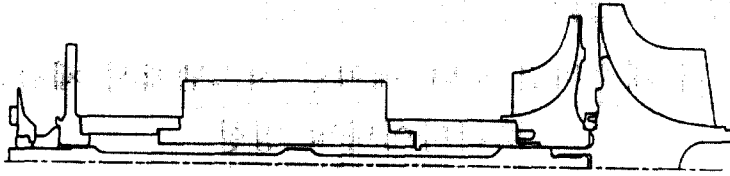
Schematic of the 100 kW prototype APU rotor.
